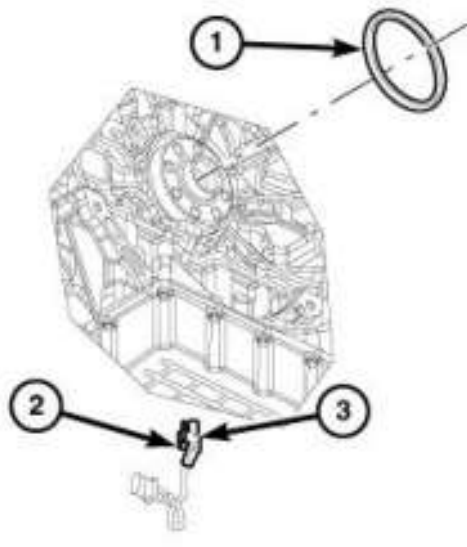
Rear Main Oil Seal, Crankshaft Position Sensor (CKP) & Bolt
